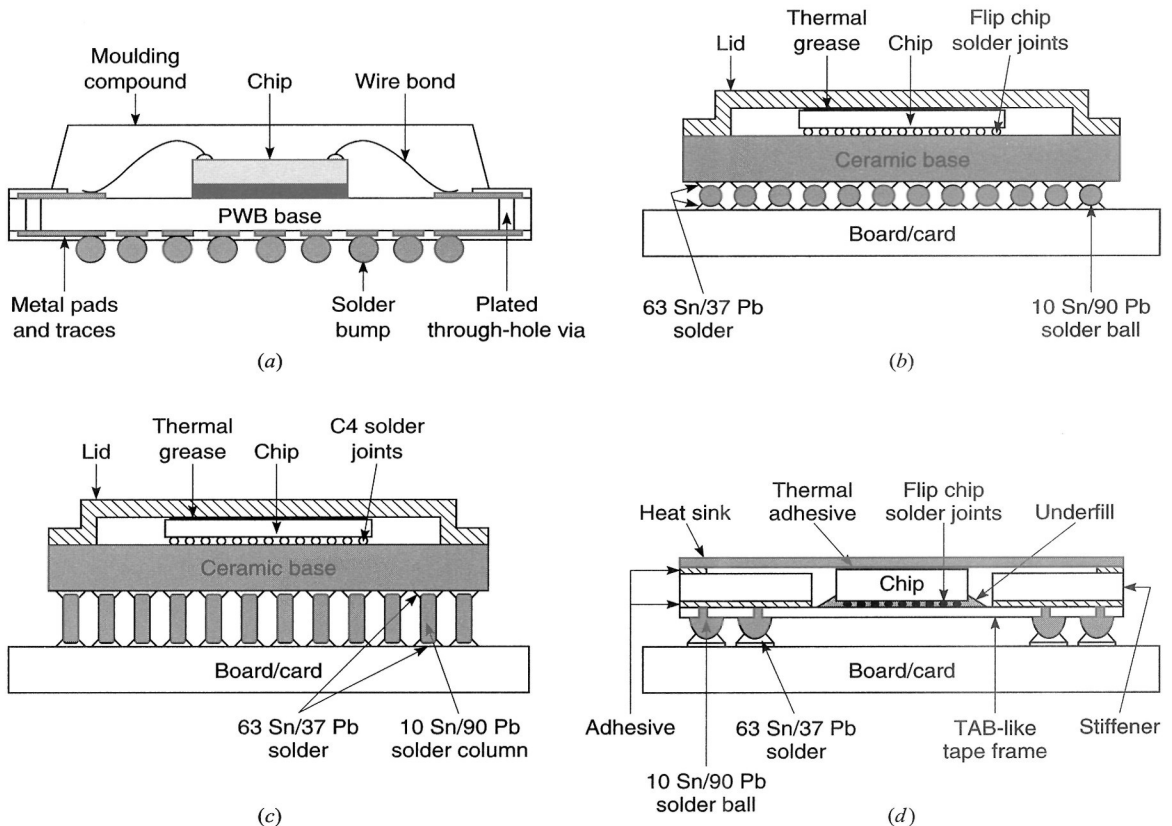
Examples of full matrix and perimeter array BGA I/O solder bumps.
